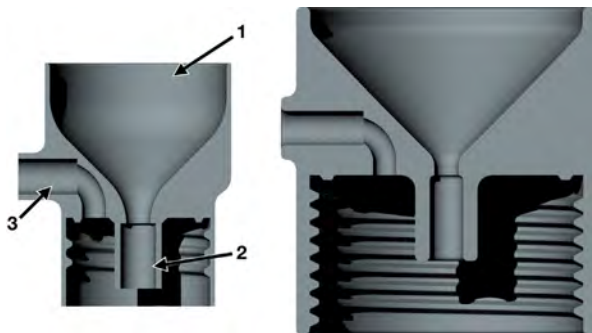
Cutaway view of the 3D printed bottle caps, with funnel (1), offset formed vent tube holder (2) and central inlet tube holder (3) (Left, cap for 225 ml bottles, right cap for 2 L bottle).
